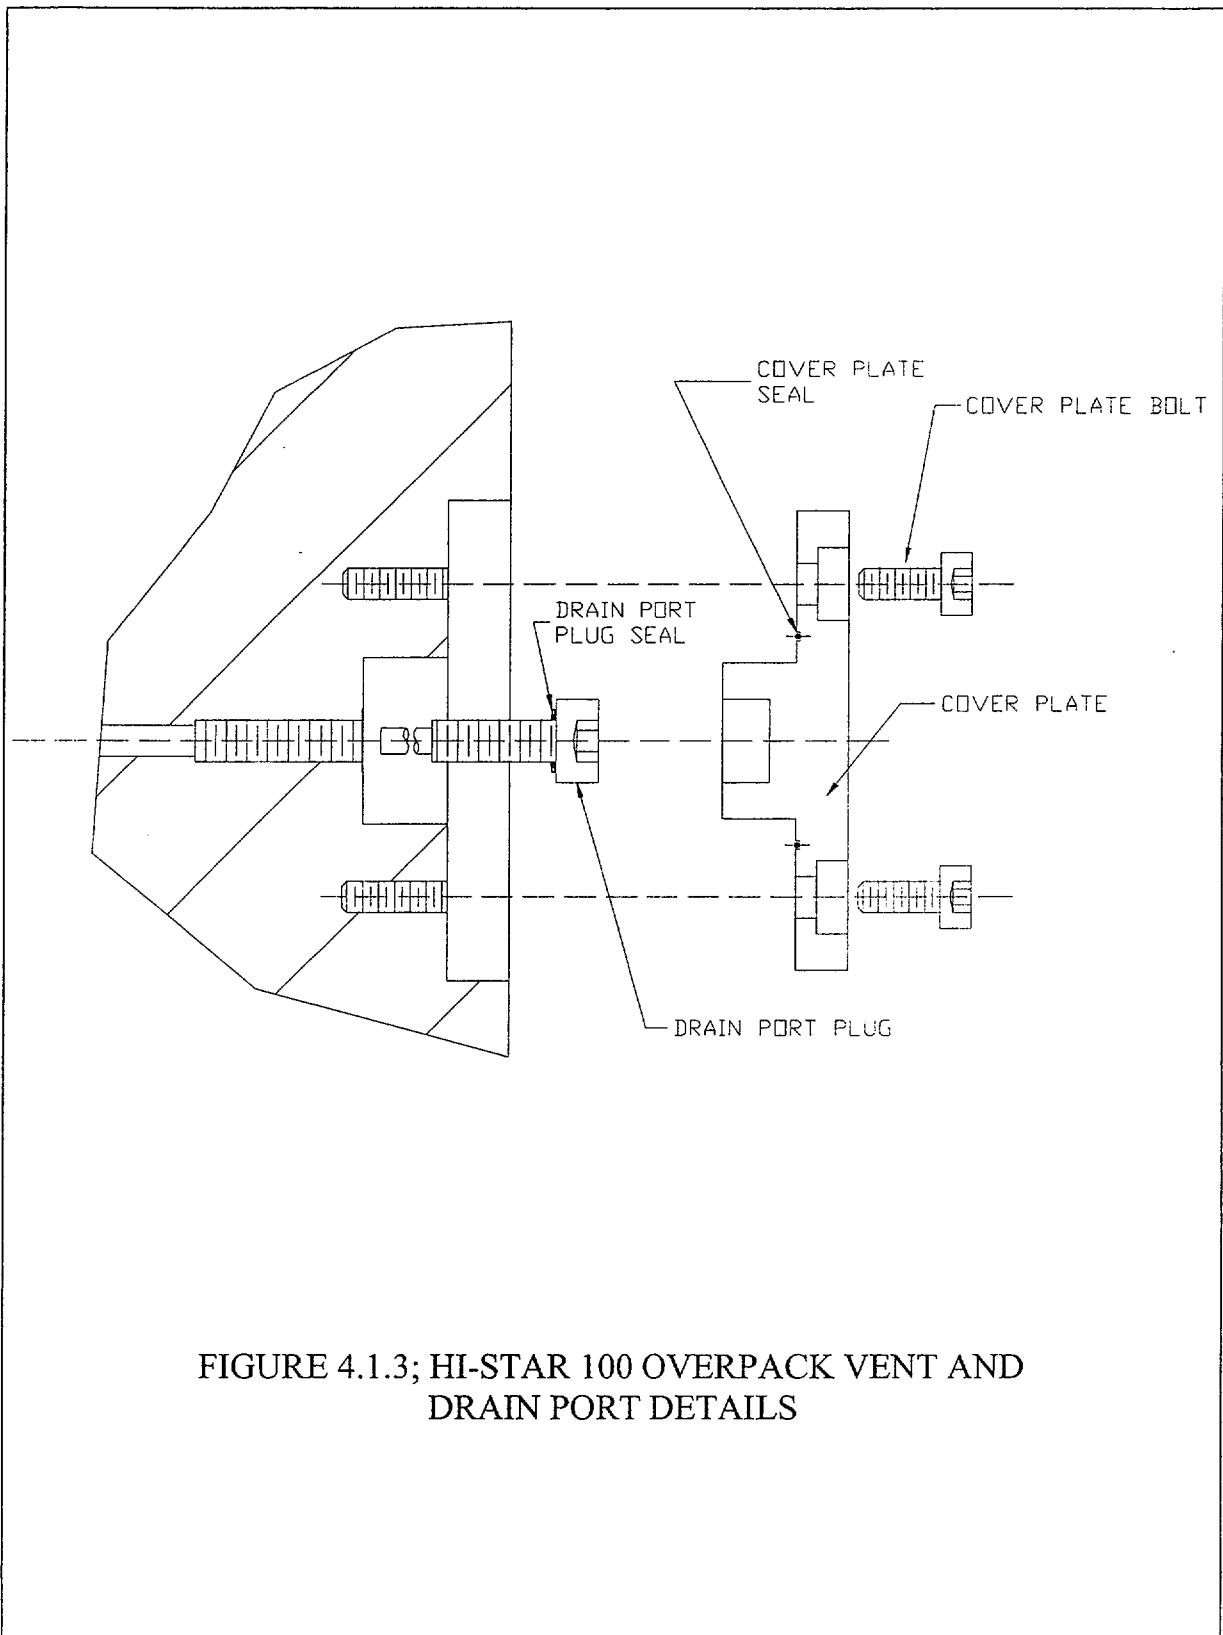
; HI-STAR 100 OVERPACK VENT AND DRAIN PORT DETAILS
